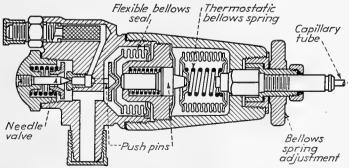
Two bellows units are used in the Fedders thermostatic expansion valve for controlling large refrigeration systems. A removable power bellows unit is operated by vapor pressure in a bulb attached to the evaporator output line. The second bellows serves as a flexible, gastight seal for the gas valve. A stainless steel spring holds the valve closed until opened by pressure transmitted from the thermostatic bellows through a molded push pin.
